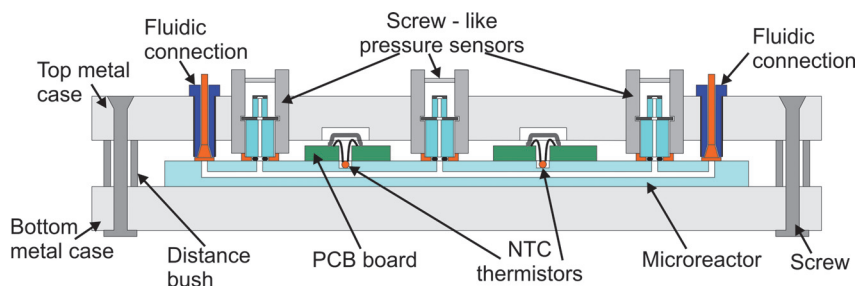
Cross-sectional view of the packaged microreactor with set of sensors
